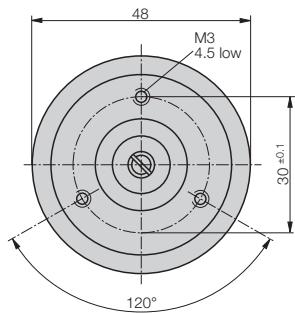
KINAX 3W2 with shaft dia. 1/4", length 12 mm.
